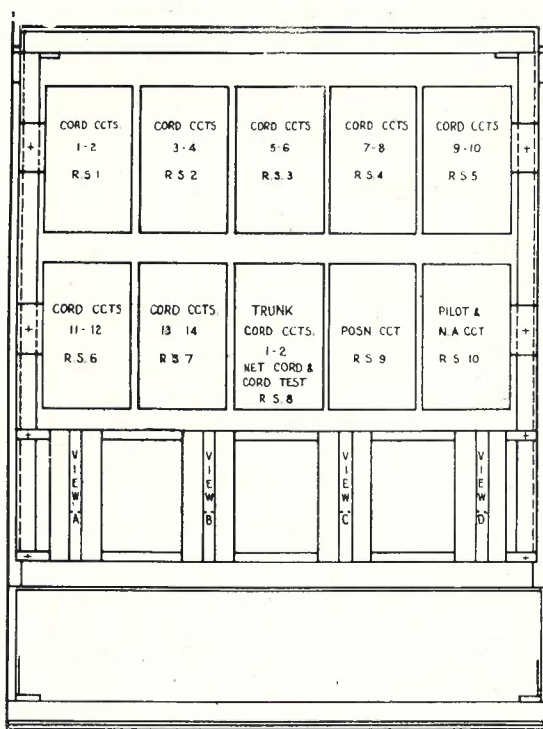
Layout of Relay Sets and Terminal Strip at rear of Switchboard.
